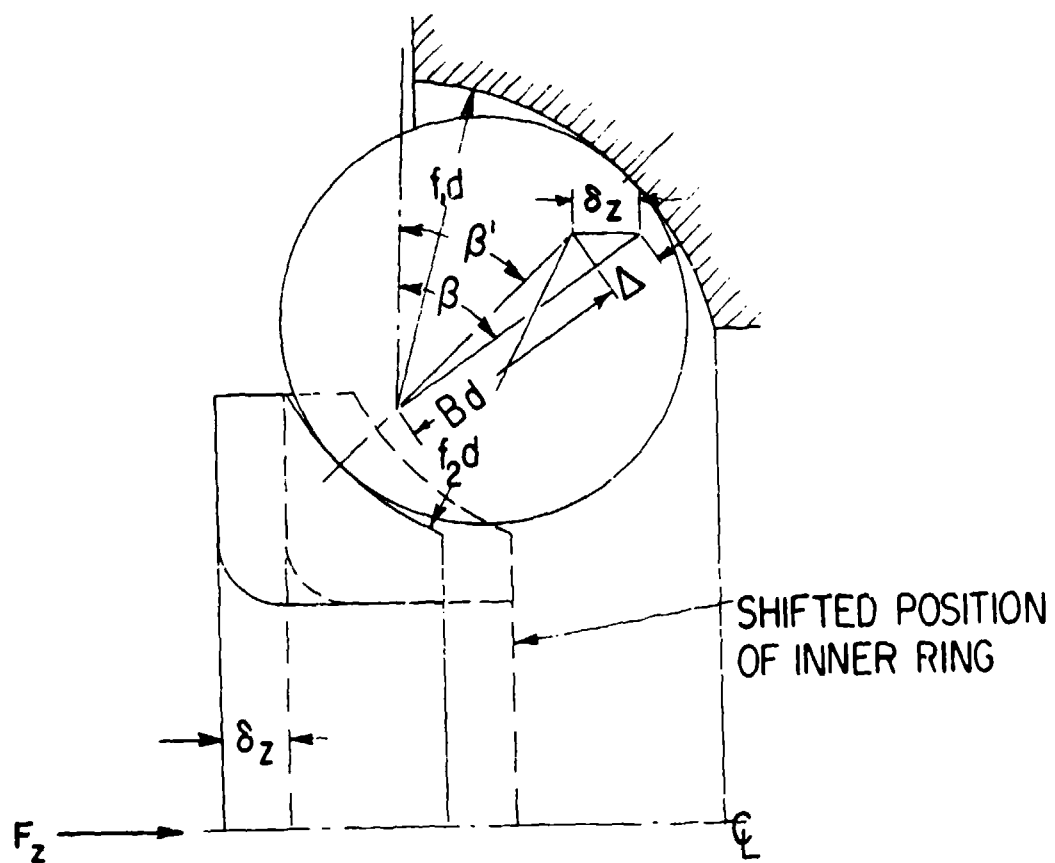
Angular Contact Ball Bearing Under Thrust Load
